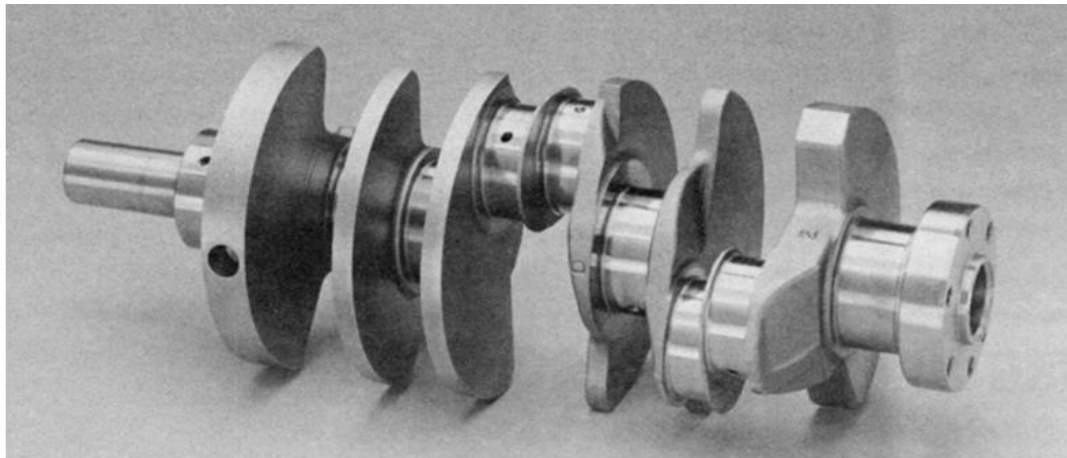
A forged-and-machined automobile engine crankshaft that has been formed from microalloyed steel. Performance is superior to cranks of cast ductile iron.
